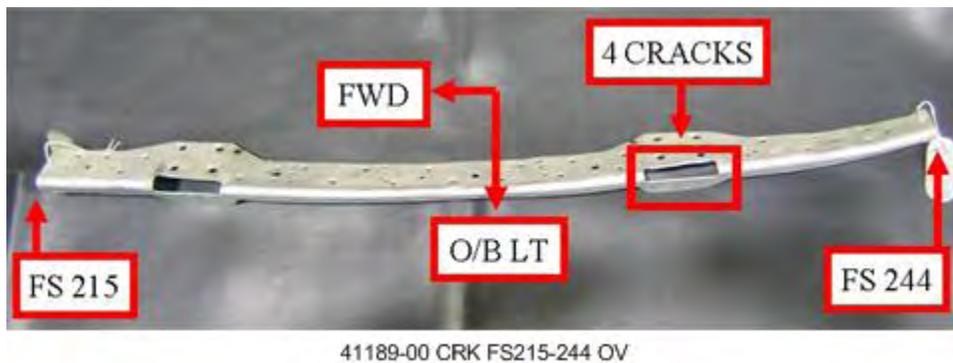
Location of Four Cracks on the Door Sill Support Aft Body FS 215 Through FS 244
